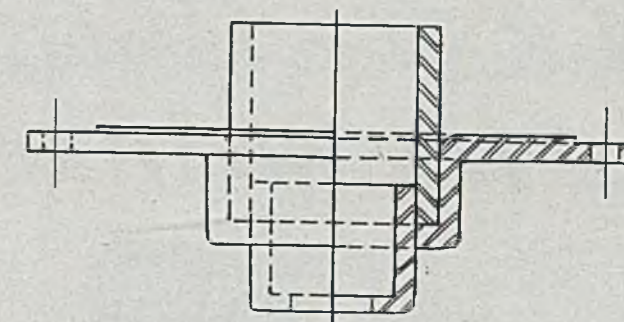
This part for 50-caliber machine gun is assembled from 14 stampings
